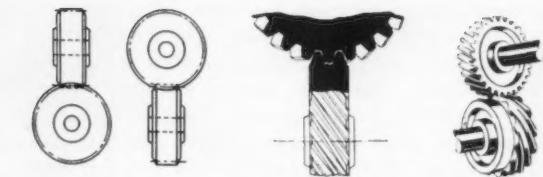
(Above) The geometry of frictional rolling surfaces and crossed helical gears
